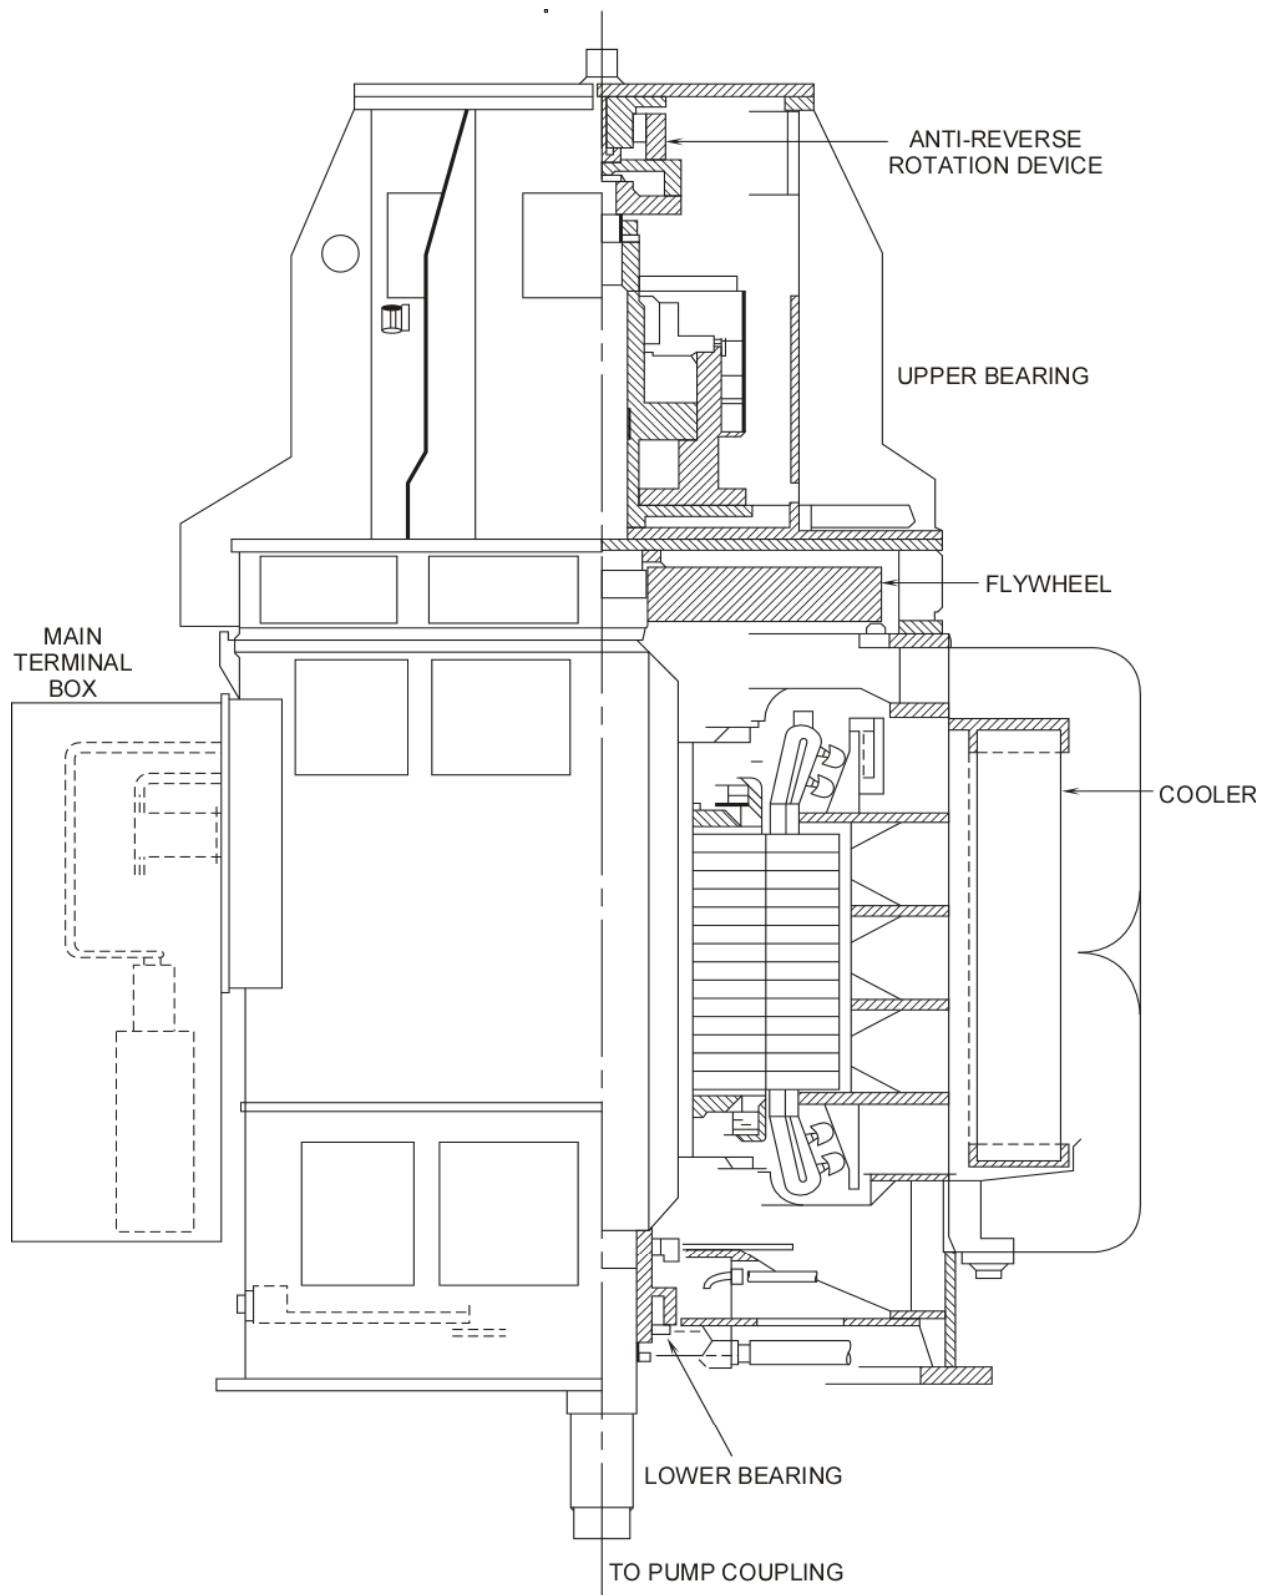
Reactor Coolant Pump Motor Assembly
